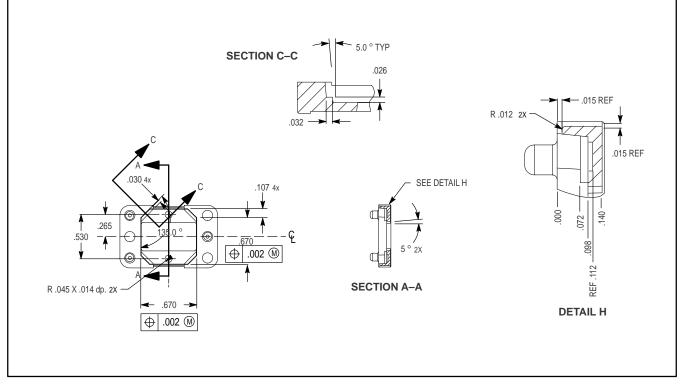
Top Side Piston Fit Bottom Cavity Geometry
